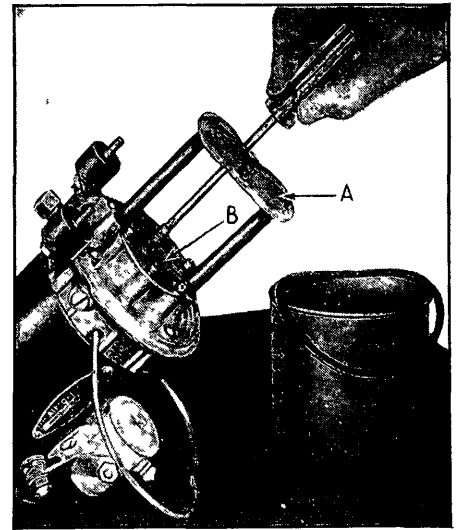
Dura pump. Sh wing intake and discharge tubes "A", and rotor cavity plate "B"
